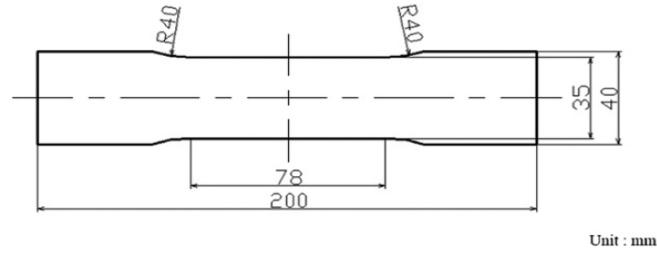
Geometry and dimensions of the specimens used at TUAT
